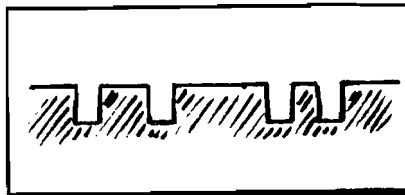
Same, after removal of surface layer, taking dings and scratches out.
